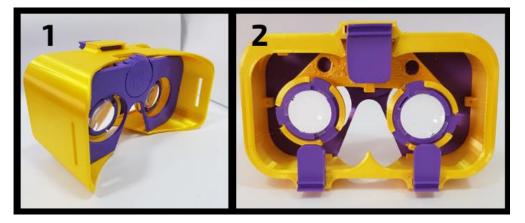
Prototype assembled after FDM printing. 1: rear view; 2: front view.
